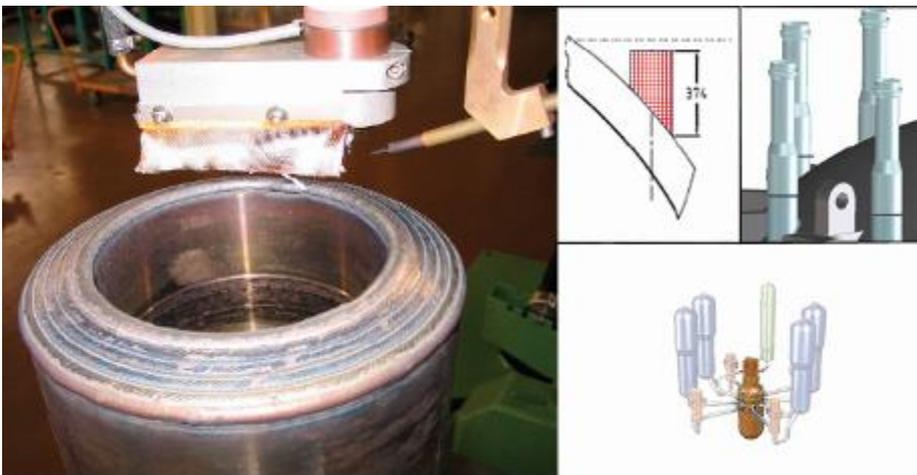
Control Rod Drive Mechanism (CRDM) adapter build-up
